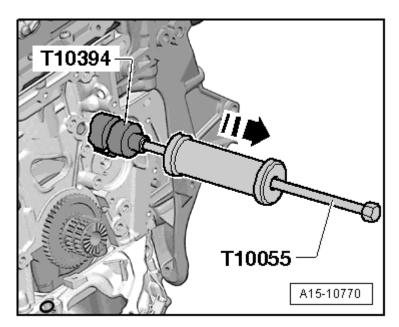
Identifying Installation And Operation Of Puller -T10055-
